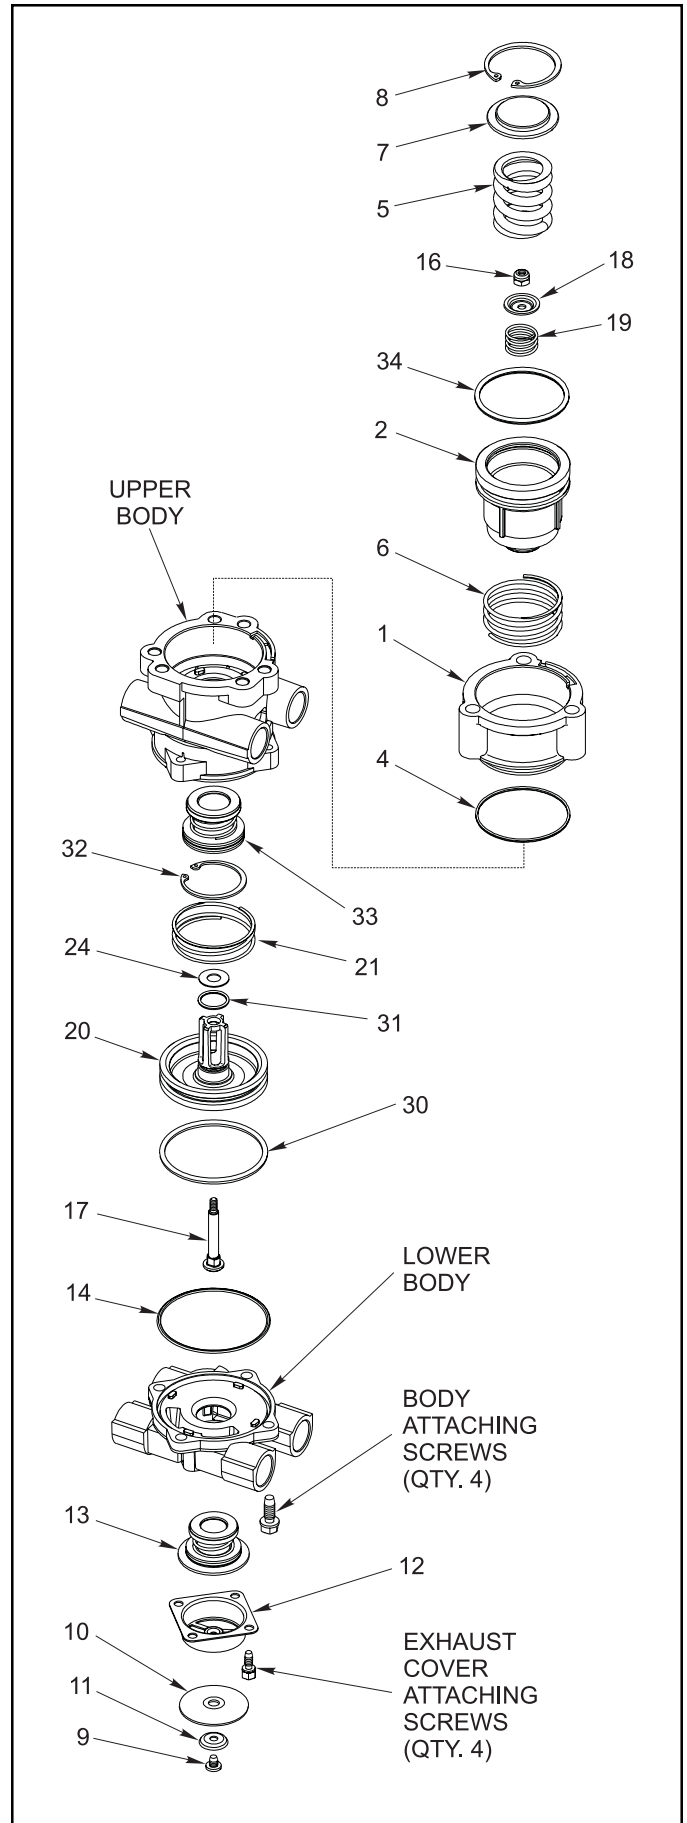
E-10P BRAKE VALVE EXPLODED VIEW
